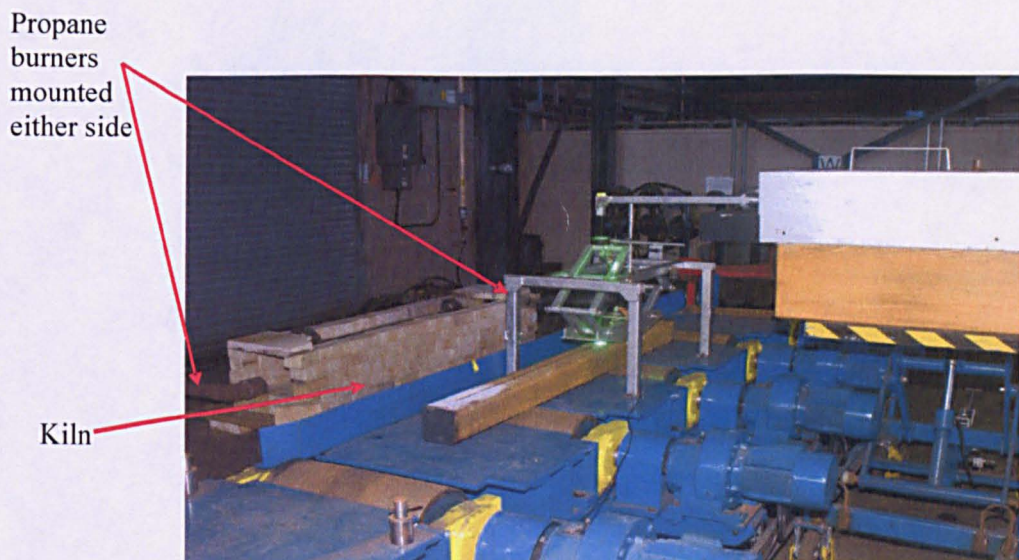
Billet being inspected at room temperature, using the Roller Straightener Mill at Teesside Technology Centre.
